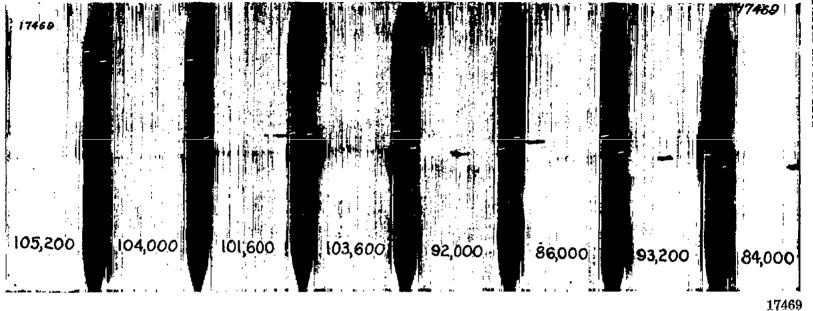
Radiograph of metal-arc-welded static tension specimens in 1/8-inch SAE 4130 sheet.
